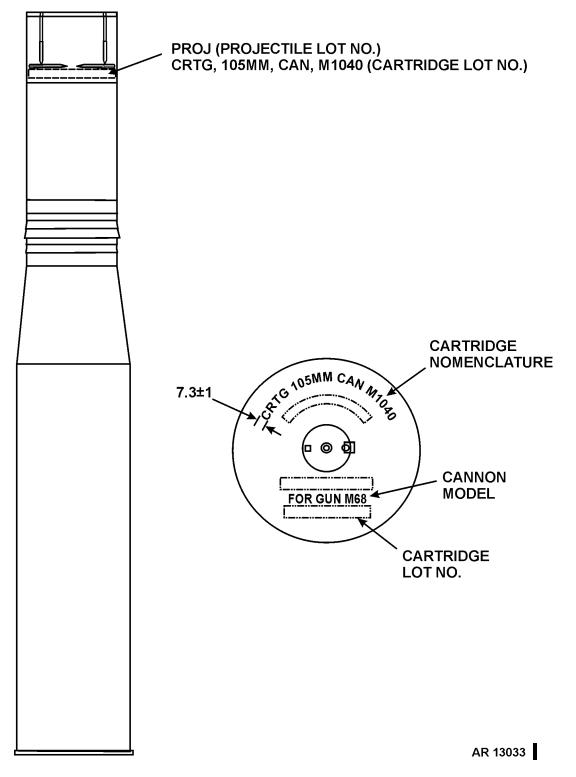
Typical Marking for 105mm Gun Cartridge, M1040.
